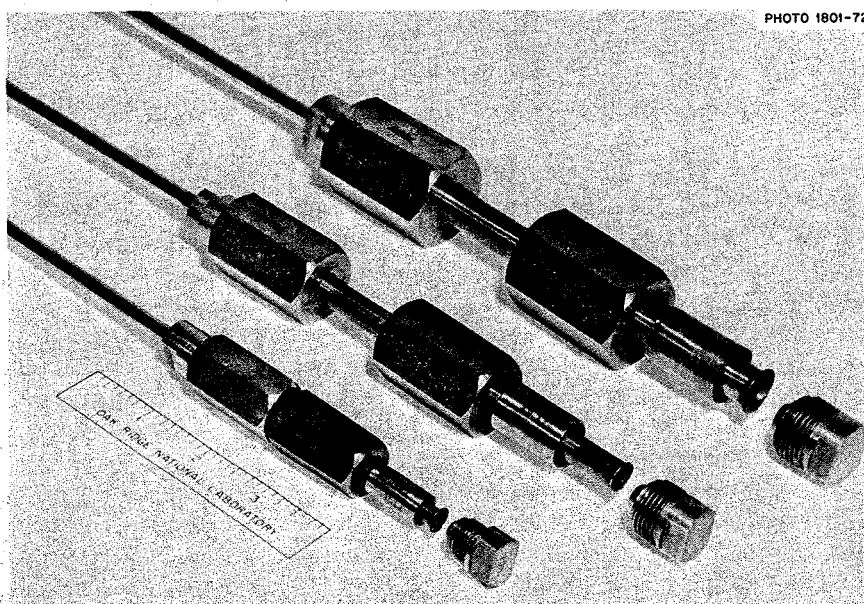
Assembled test pieces for testing molybdenum fittings with 45°-flared molybdenum tubing in sizes of  $\frac{1}{4}$ ,  $\frac{3}{8}$ , and  $\frac{1}{2}$  in.
